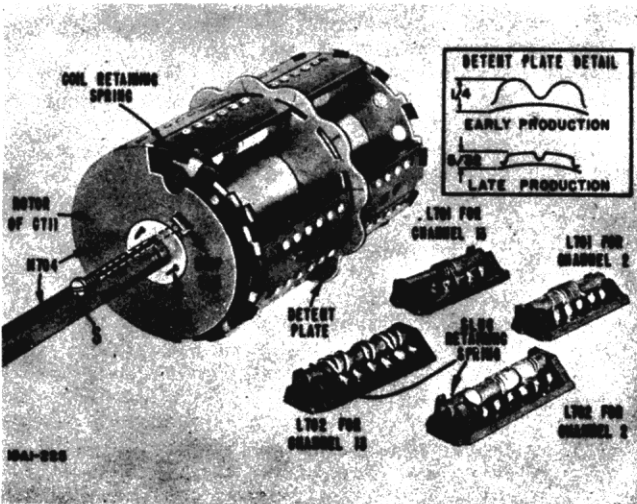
94C8-1 Tuner Turret, Showing Snap-in Coils.
